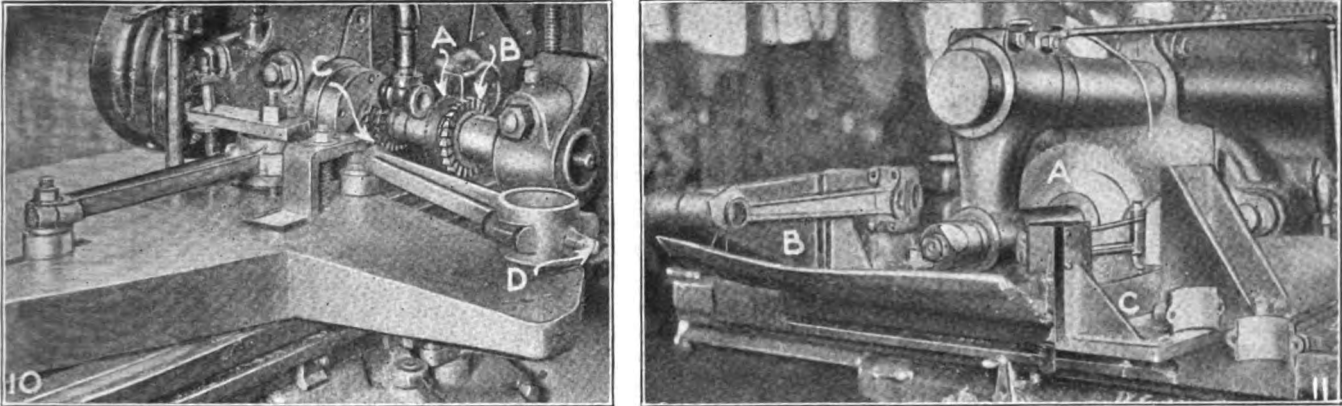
DRILLING AND TAPPING PINCH HOLE. FIG. 11. MILLING CAPS FROM THE ROD
